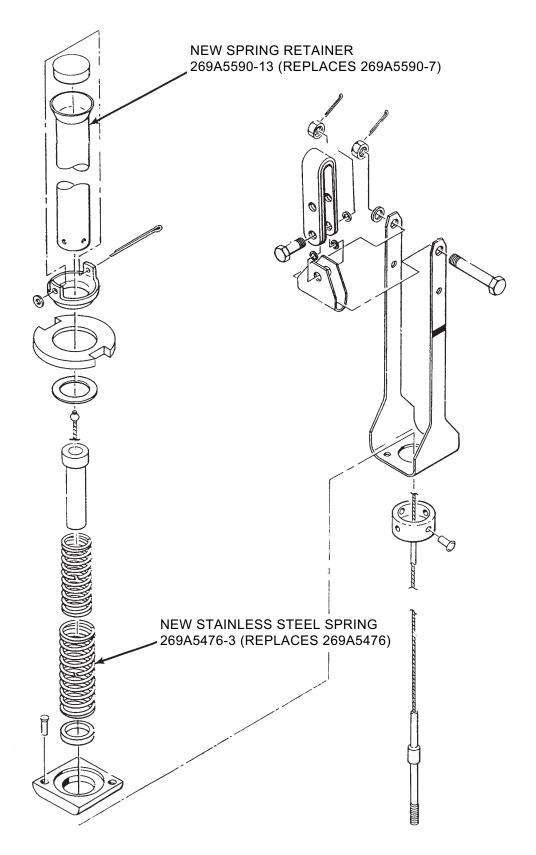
New Spring Retainer and Stainless Steel Spring
